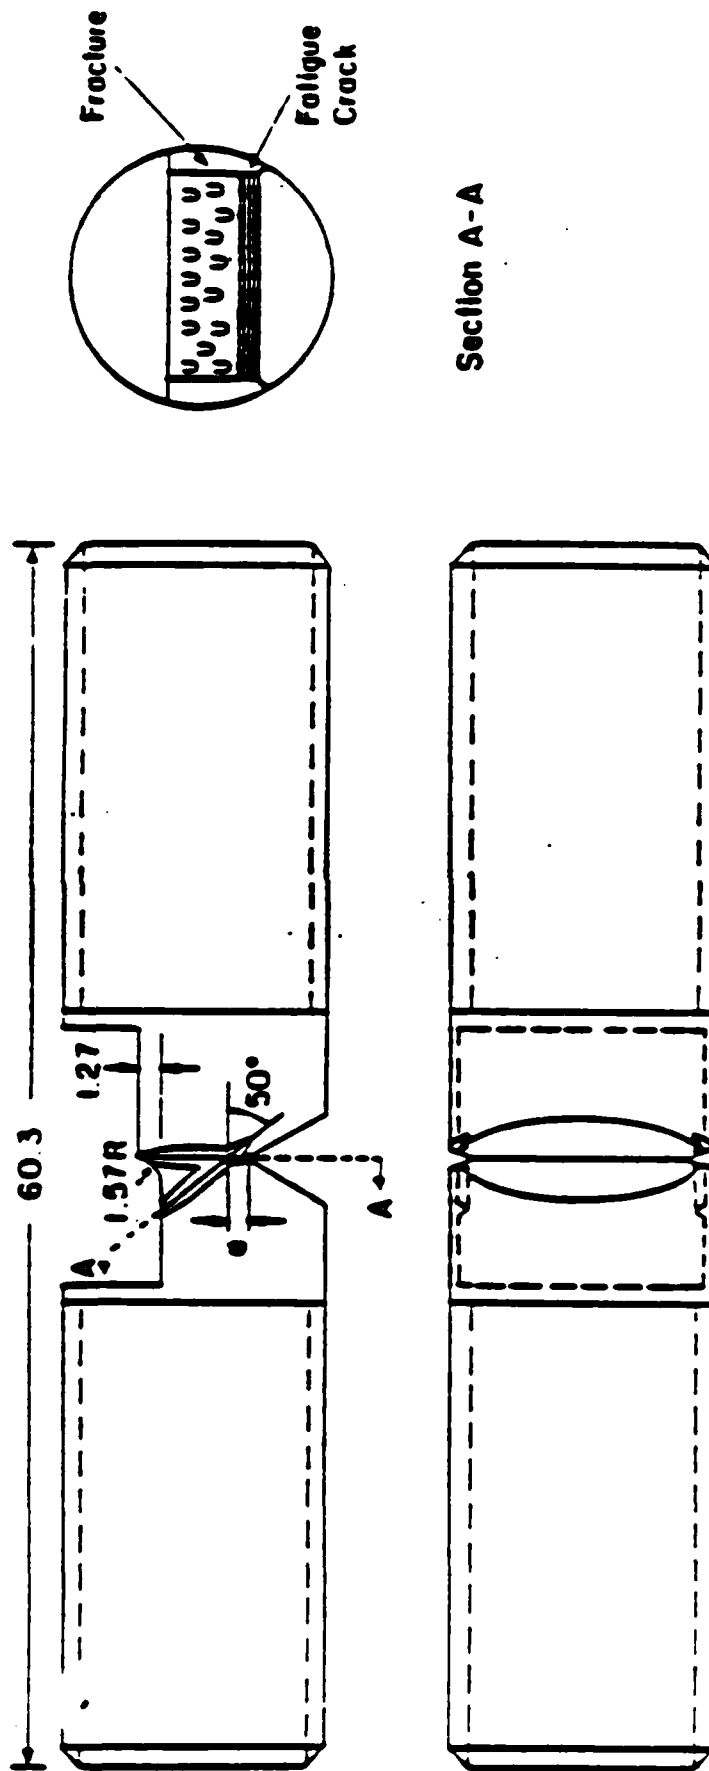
Second machining (after fatigue precracking) for the asymmetric specimens; a is the fatigue precrack.
